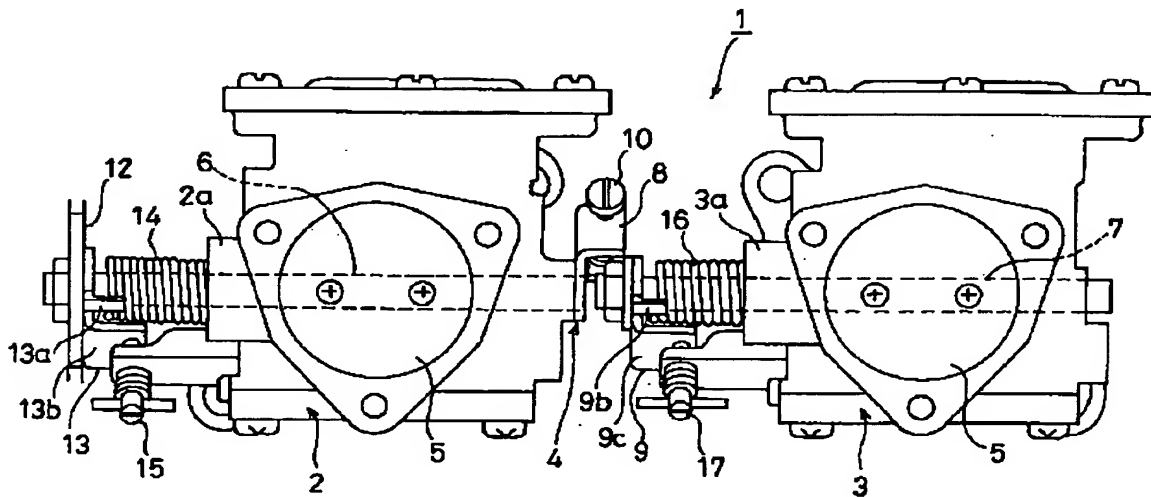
the spring return type concerning this invention -- many -- cannons equipped at a battery -- it is the front view of a mold carburetor.
